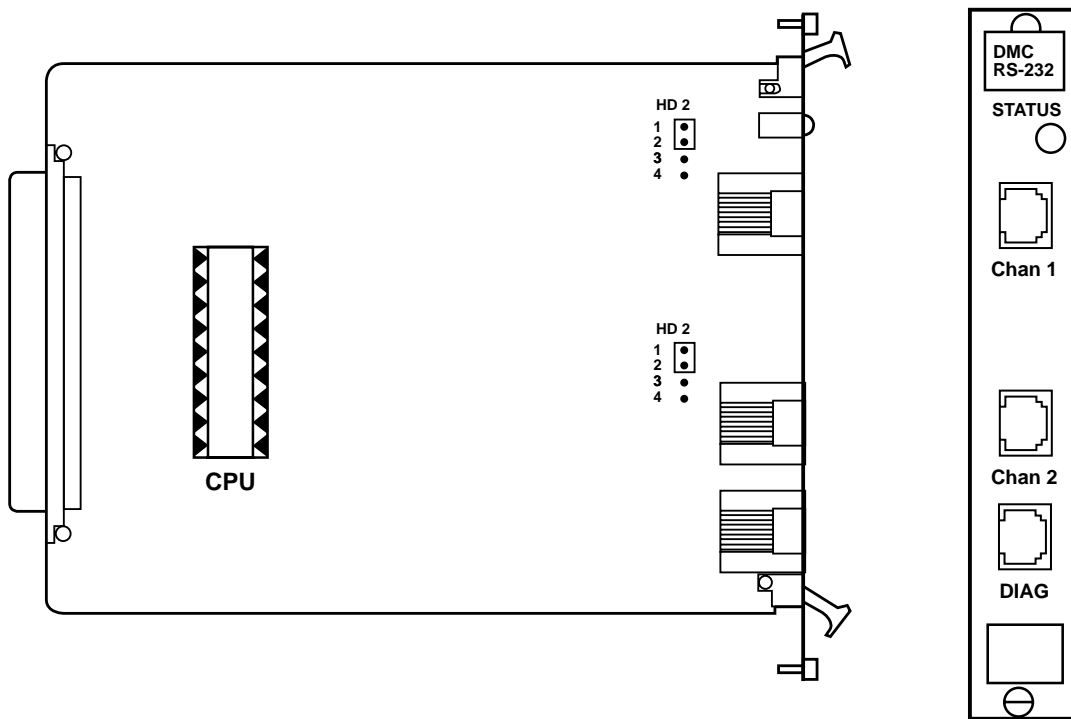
Dual Modem Rear Plug Assembly, Showing the RJ-232 Card.
